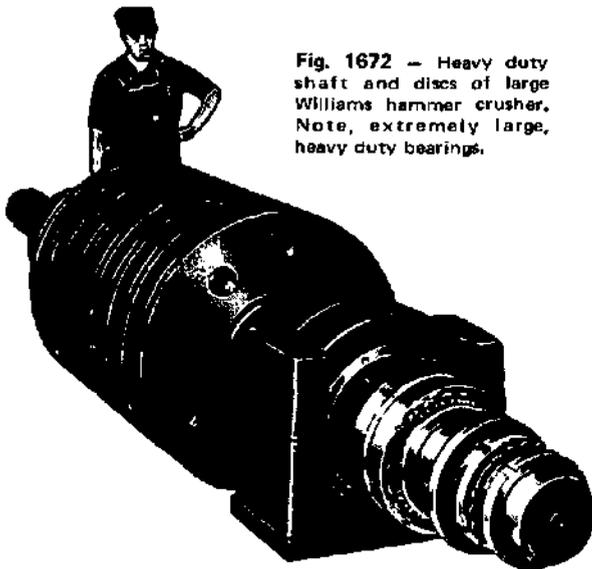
Heavy duty shaft and discs of large Williams hammer crusher. Note, extremely large, heavy duty bearings.
